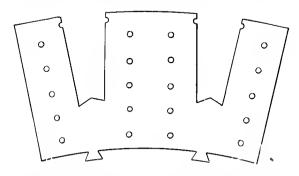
Field core stamping of electrical steel for revolving field alternator (Westinghouse) showing bolt holes for assembling and securing sheets.
